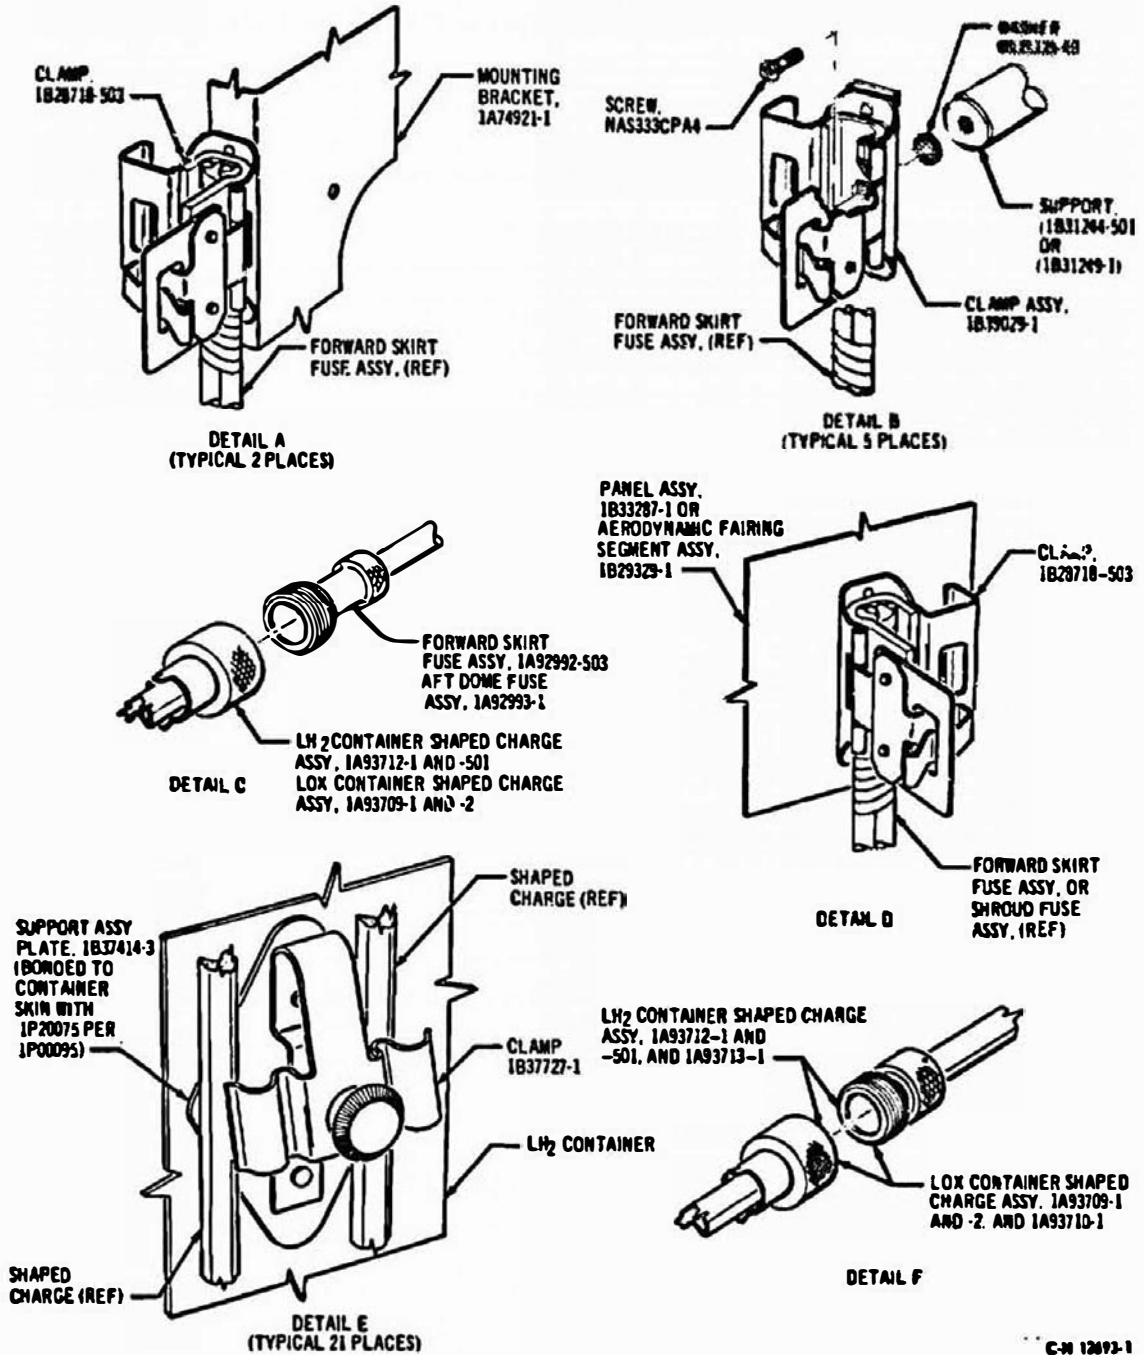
SHROUD FUSE ASSEMBLY - INSTALLATION VIEW
